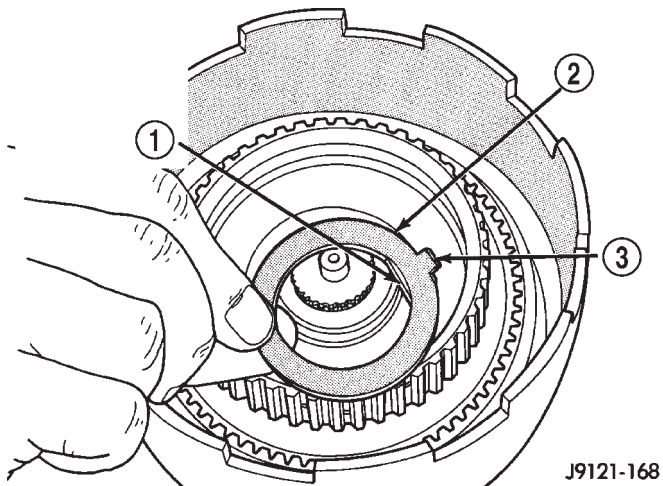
Positioning Thrust Plate On Front Annulus Support
